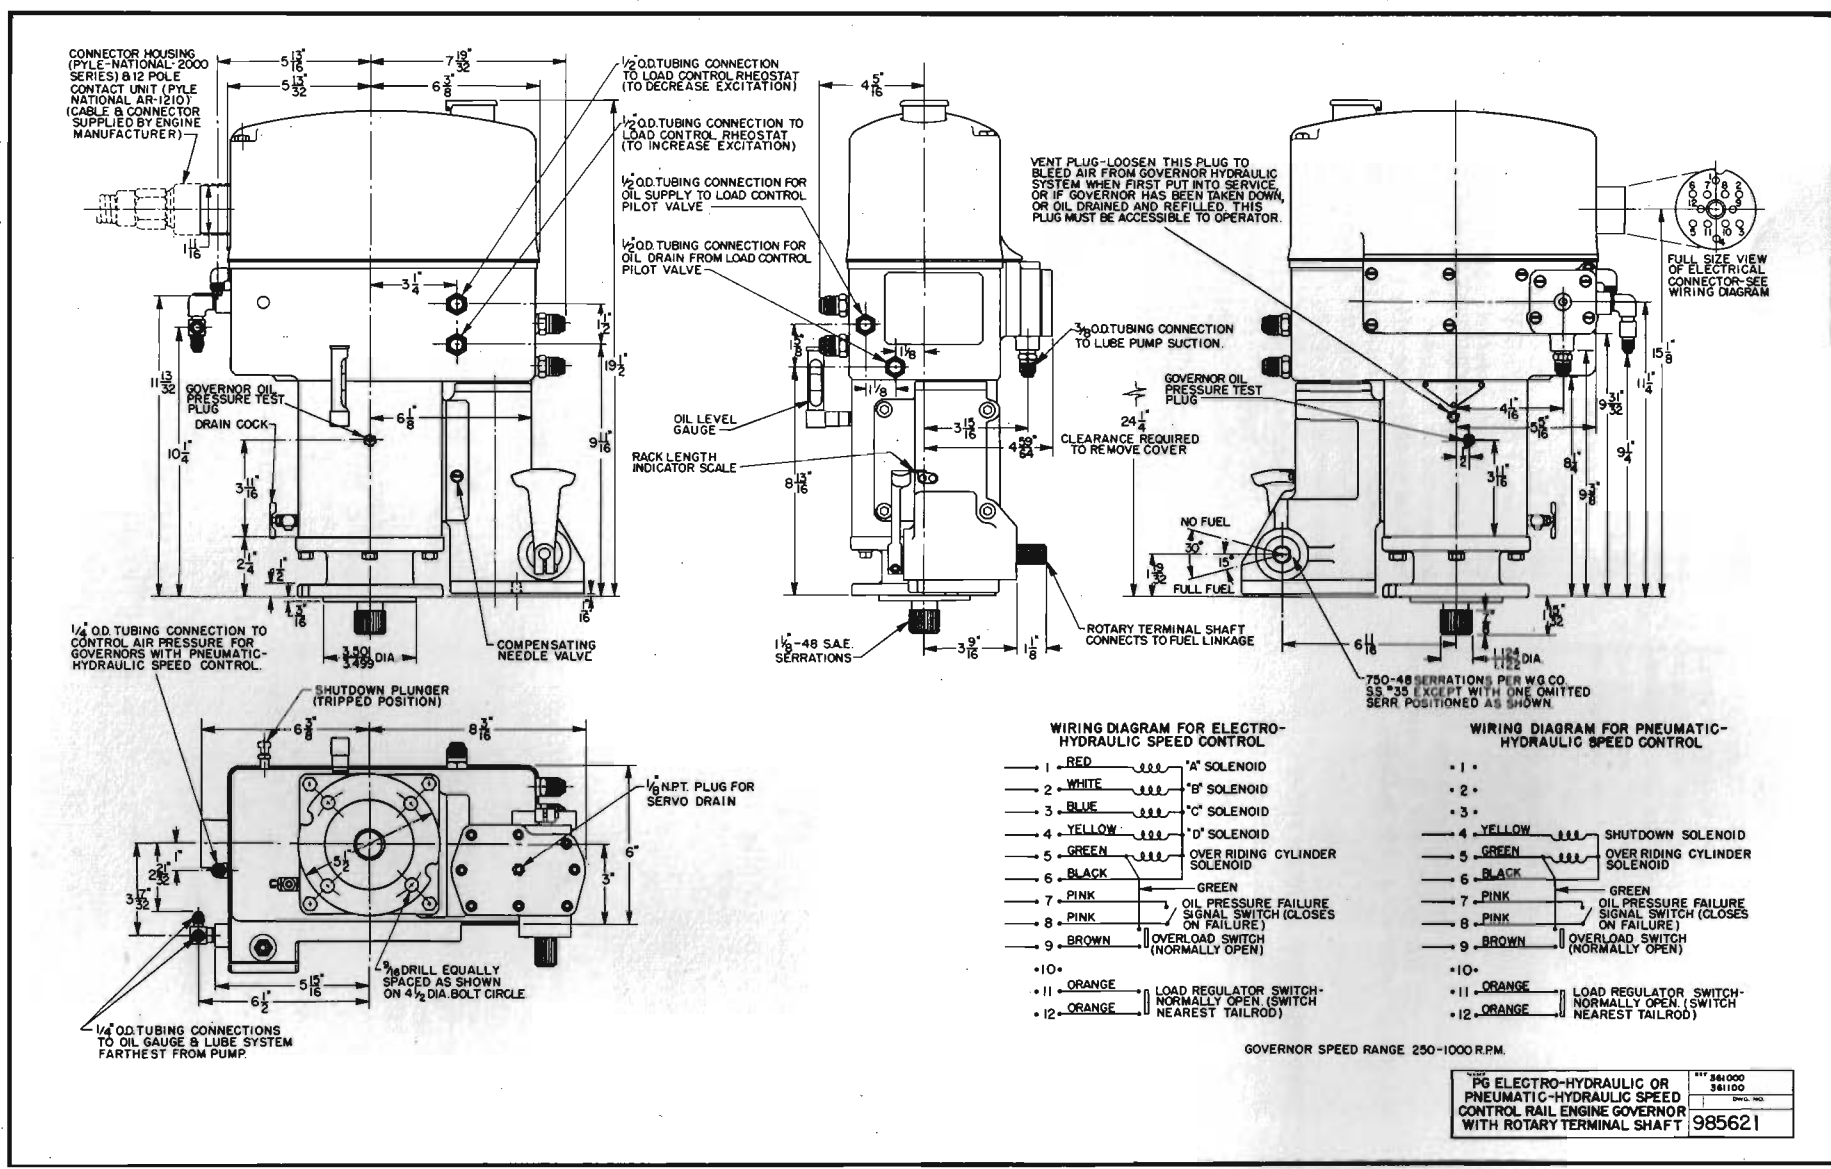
Outline Drawing, PG Locomotive Governor with Rotary Terminal Shaft.
